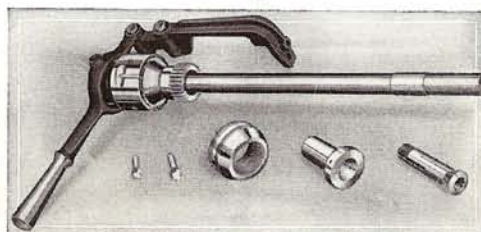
Hand Lever Type Draw-in Collet Chuck Attachment. Must be fitted to Lathe at Factory.
